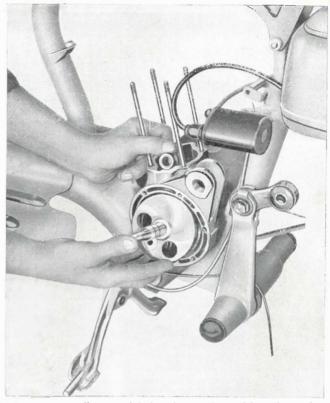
How to pull out crankshaft and connecting rod from the crankcase.
